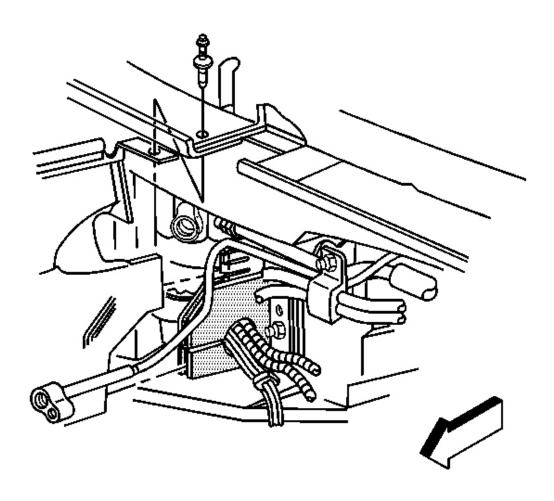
View Of Upper Plenum Heat Shield Retainer Courtesy of GENERAL MOTORS CORP.
